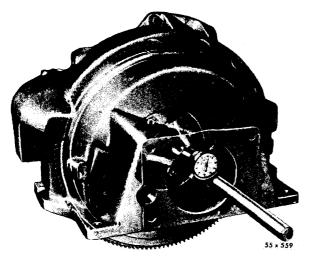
Checking Clutch Housing Bore, Using Attaching Fixture Tool C-870
